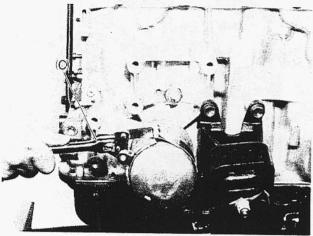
(C) Oil filter wrench (09915-47310)
